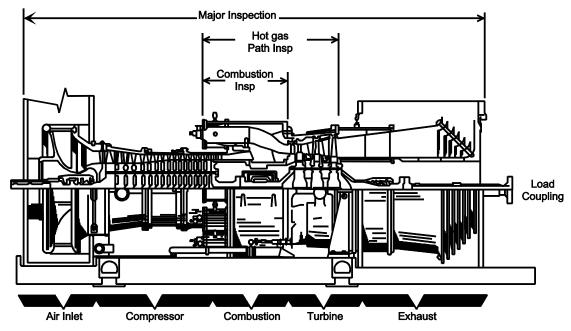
Single Shaft Combustion Turbine, Showing Inspection Scopes.
